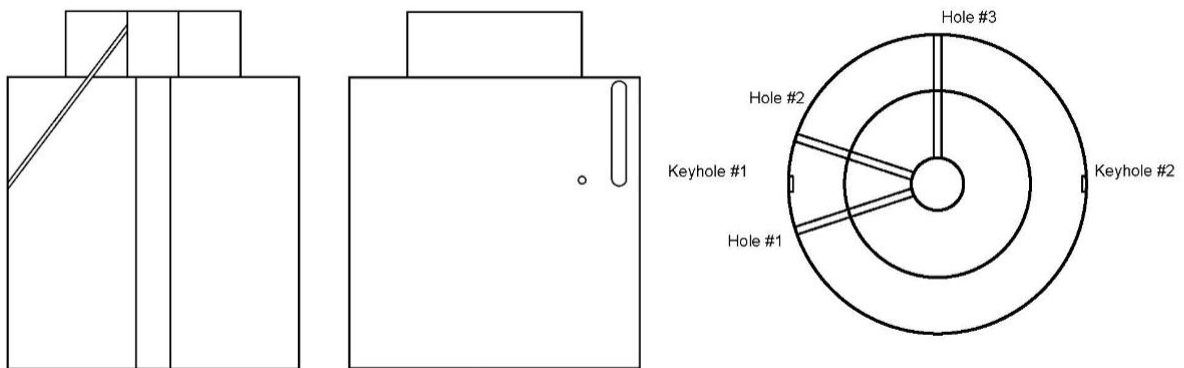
Mock-up Pin details CAD drawings showing the grease hole directions.
